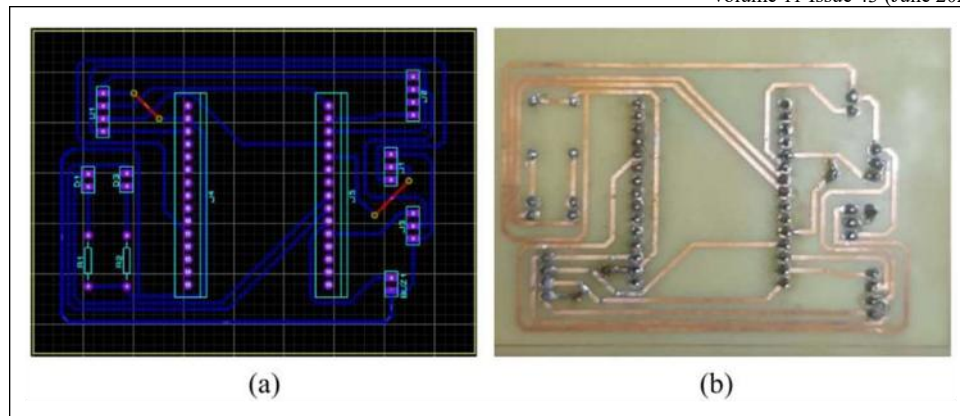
PCB Design Layout (A) and The Fabricated PCB (B) for The Smart Waste Monitoring System, Showing the Electrical Circuit and Component Placement
